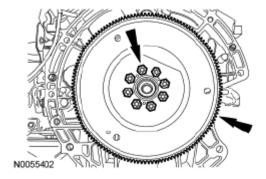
Locating Flexplate Bolts Courtesy of FORD MOTOR CO.
